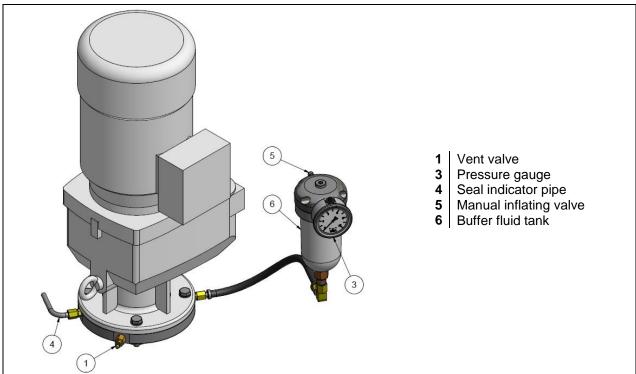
Change of the buffer fluid for RotaCut without ACC
